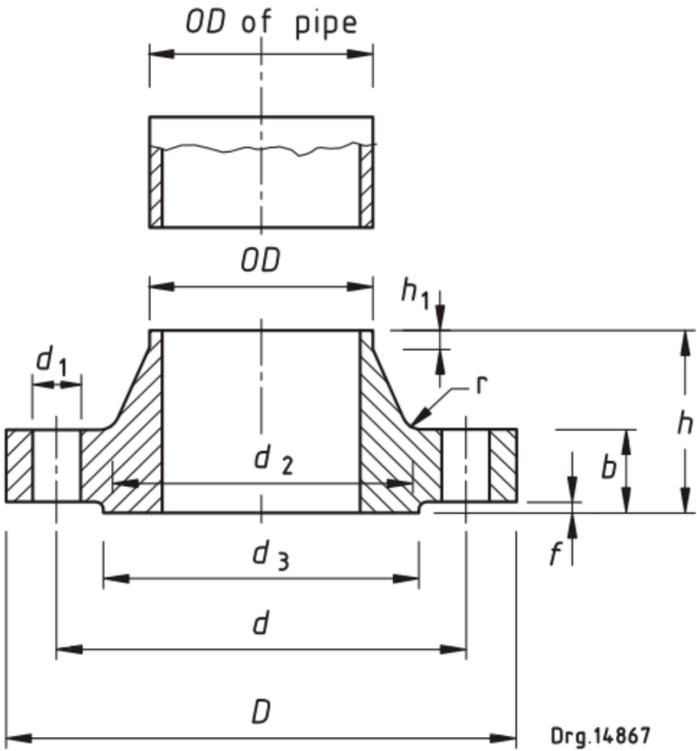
(b) — Type 2: Steel welding neck flange
